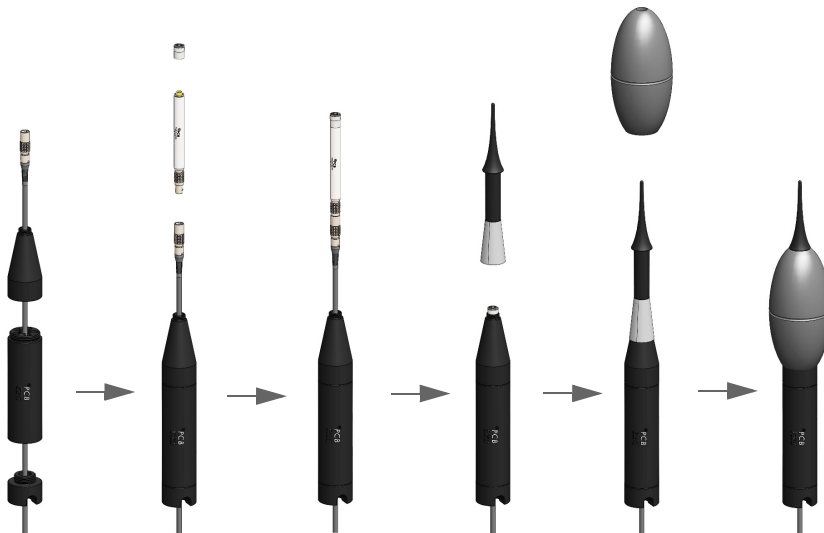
PRM2103-FF Assembly and Mounting for EPS2116
